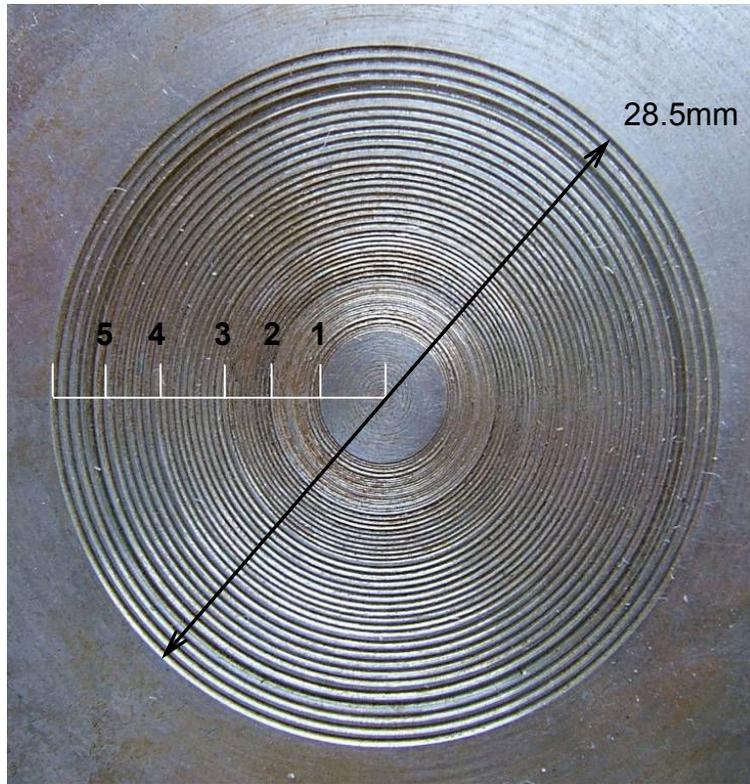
General view of the die used for fine forging of samples. Notice complexity of die geometry. Numbers 1-5 show number of the section on the die surface. The ridges geometry of different section (Table 1) is different.
